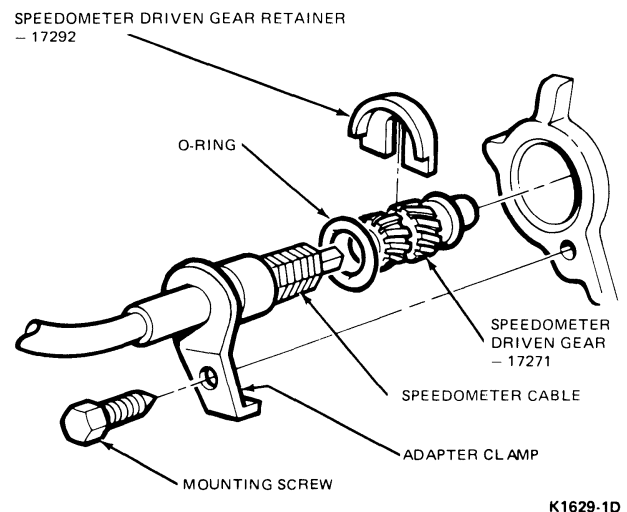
Speedometer Driven Gear Mounting at Transmission
